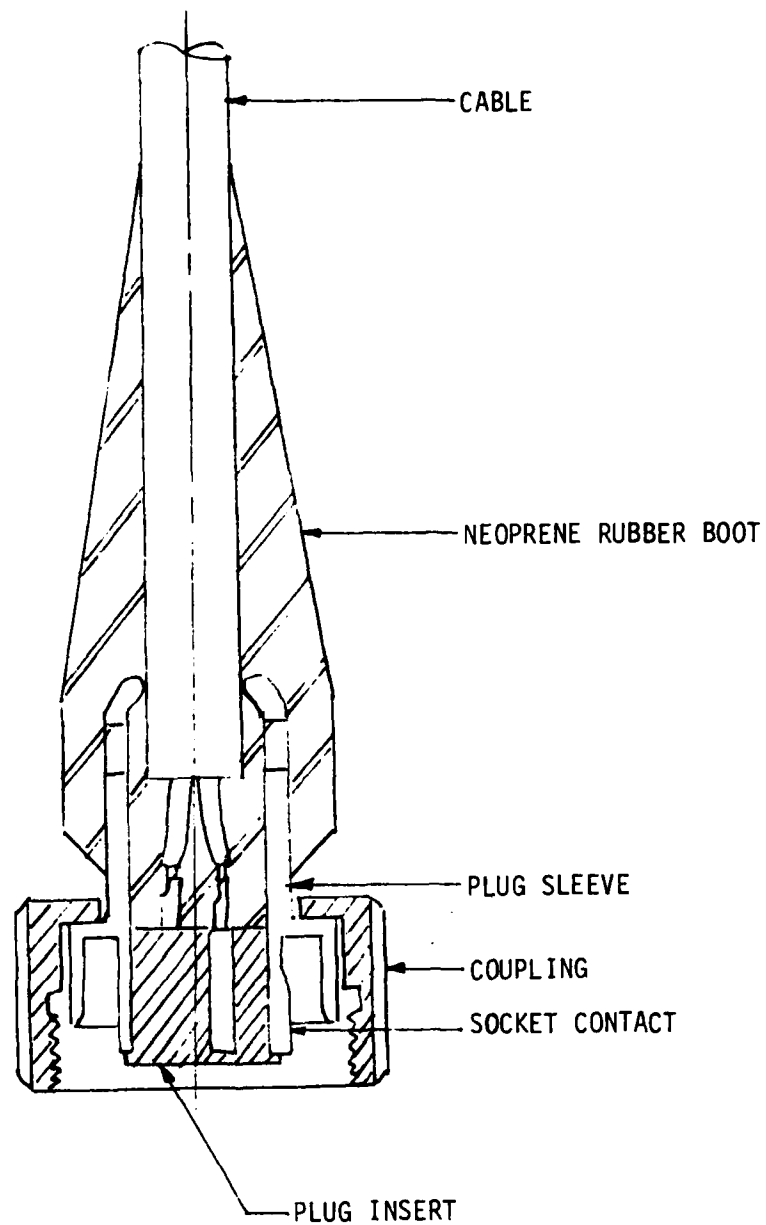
NEOPRENE MOLDED MIL-C-24231 PLUG ASSEMBLY
